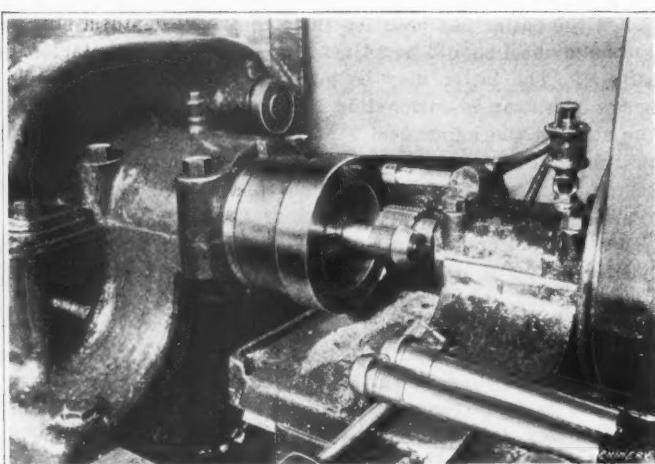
External Thread Milling on Multiple-cutter Type of Machine
